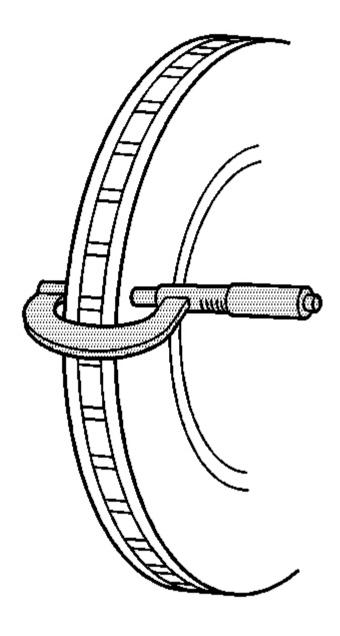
Measuring Brake Rotor Courtesy of GENERAL MOTORS CORP.
